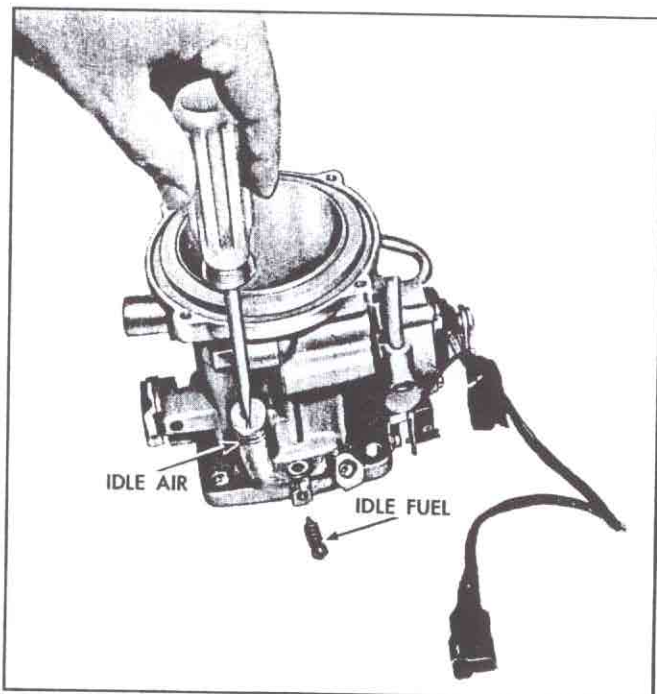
Removing Idle Fuel and Idle Air Adjusting Screws
